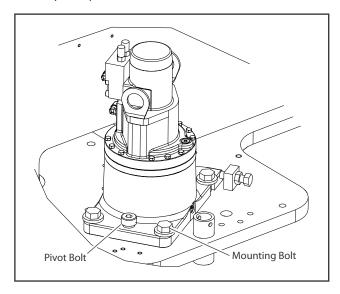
Swing Drive Pivot and Mounting Bolts
